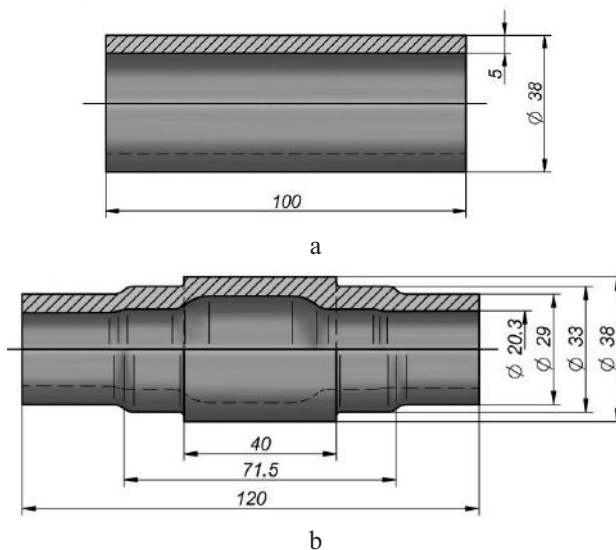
Shape and dimensions of the blank (a) and forging (b).
